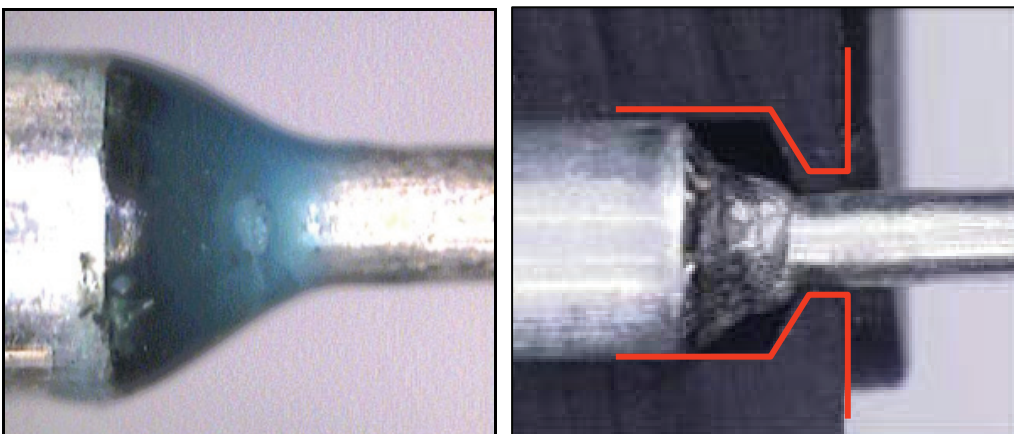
Coating with epoxy resin (left) or enclosing of the welding joint (ACEA et al. 2009b)
